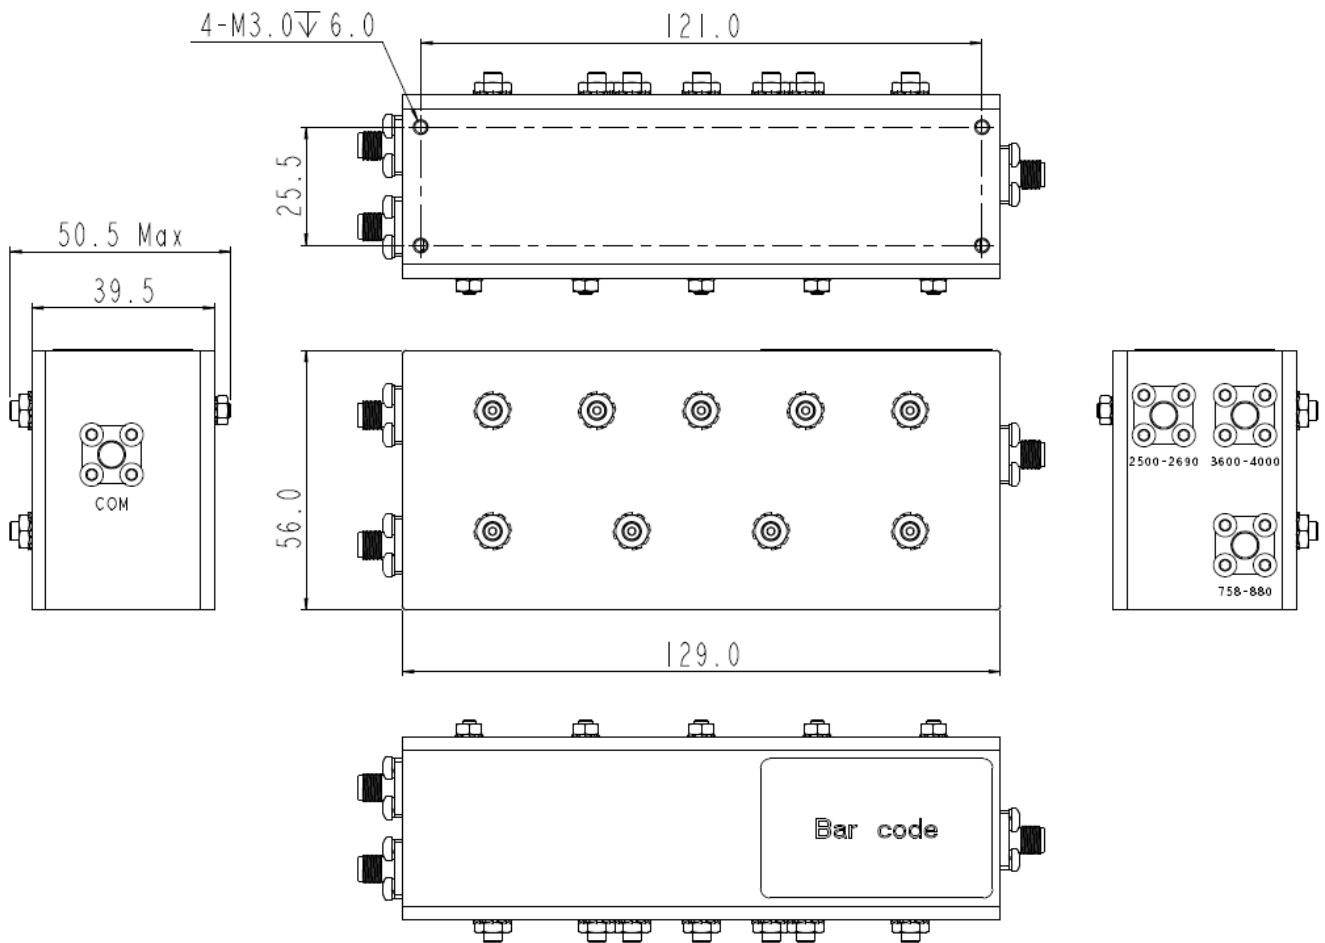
JX-CC3-758M4000M-20S2 front panel layout
